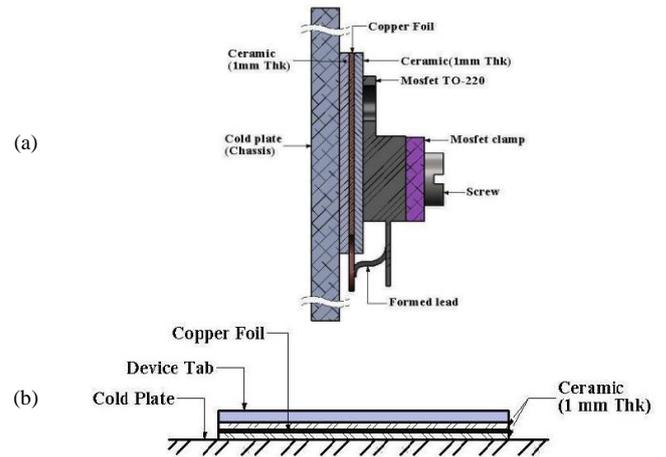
Mounting arrangement-3 (a) Cross sectional view (b) Tab-chassis capacitance
